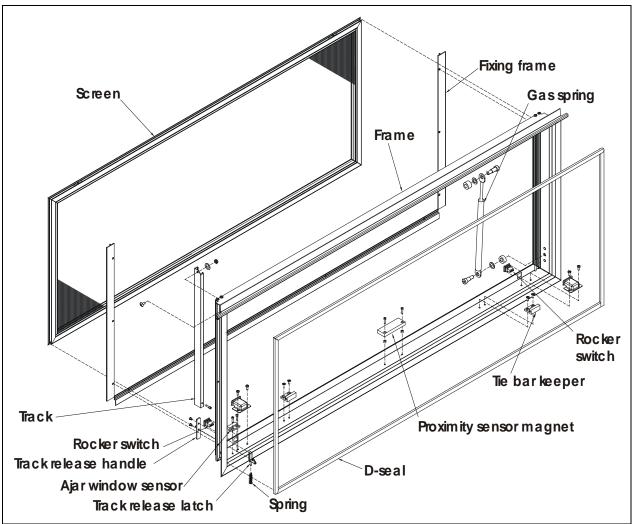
ELECTRIC AWNING WINDOW EXPLODED VIEW (FRAME)
